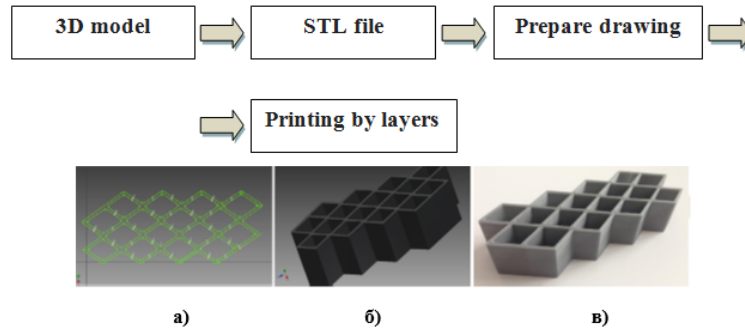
a) scheme b) 3D model C) Printed copy printed with a 3D printer device.
